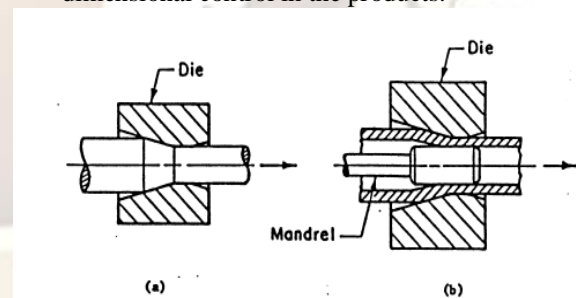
Types of Cold drawing (a) wire and bar drawing and (b) Tube drawing
